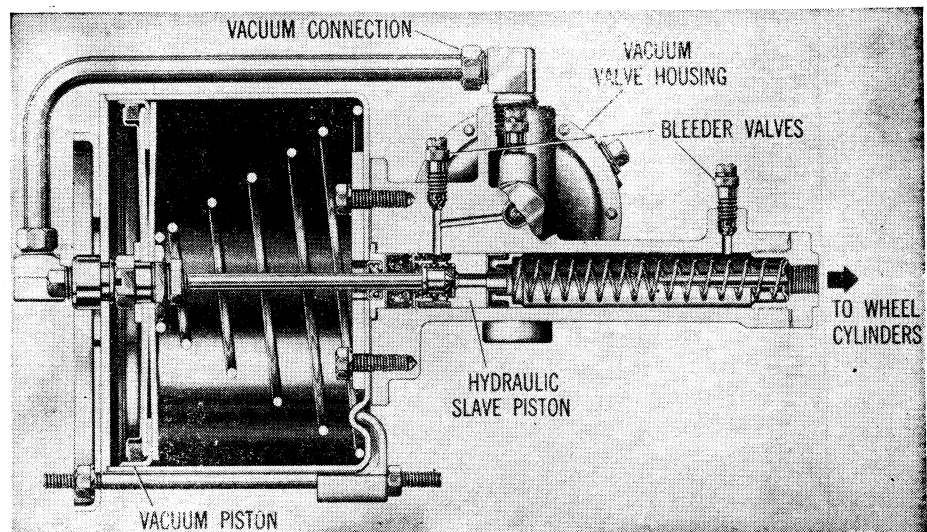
Section through Second Series Hydrovac with control valve integral with hydraulic slave cylinder, and single piston vacuum suspended power cylinder
